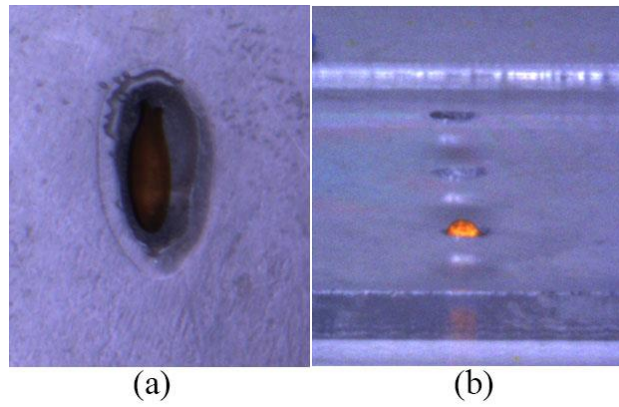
Result from the needle (vacuum gripper) handling (a) top view (b) side view
